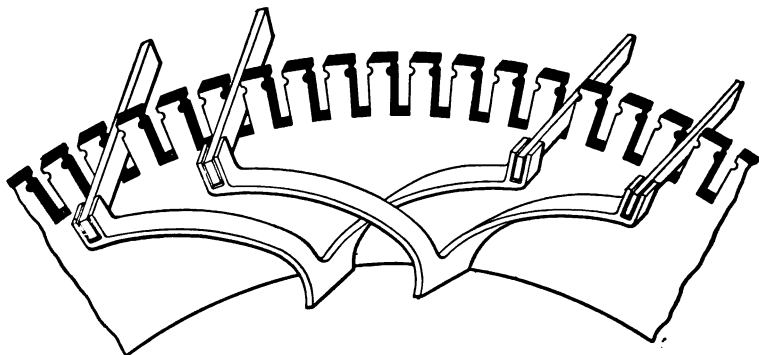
End connections in a double-layer bar winding (evolute winding).
